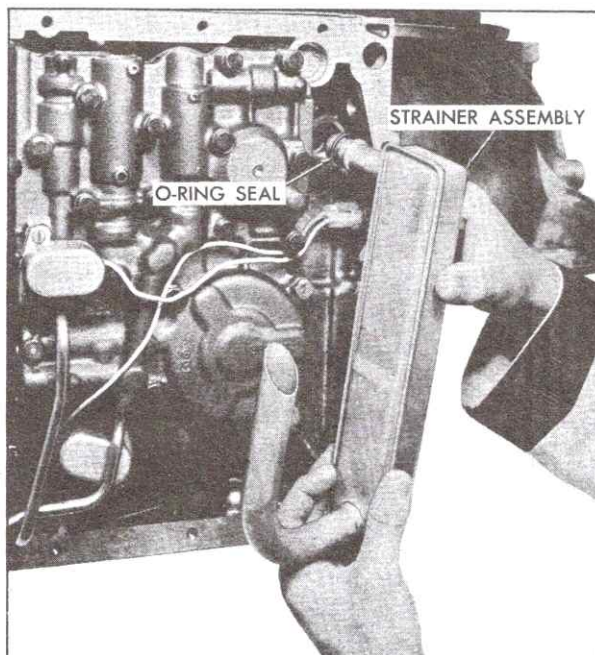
Removing Intake Pipe and Strainer Assembly
